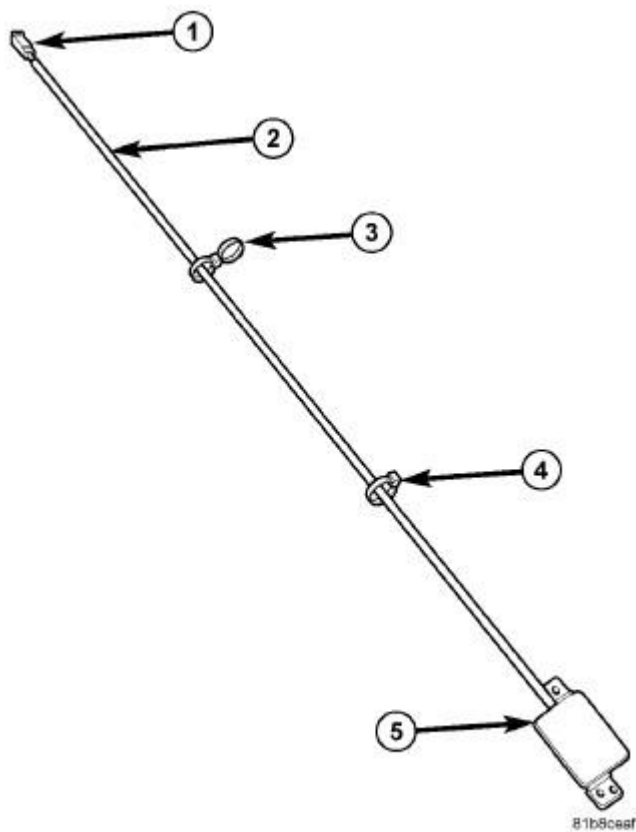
REMOTE START ANTENNA MODULE ASSEMBLY
